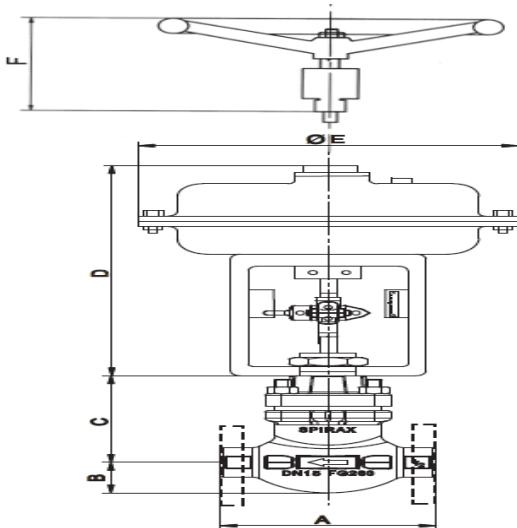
Overall dimensions of SPIRA-TROL valve with actuator [8]
